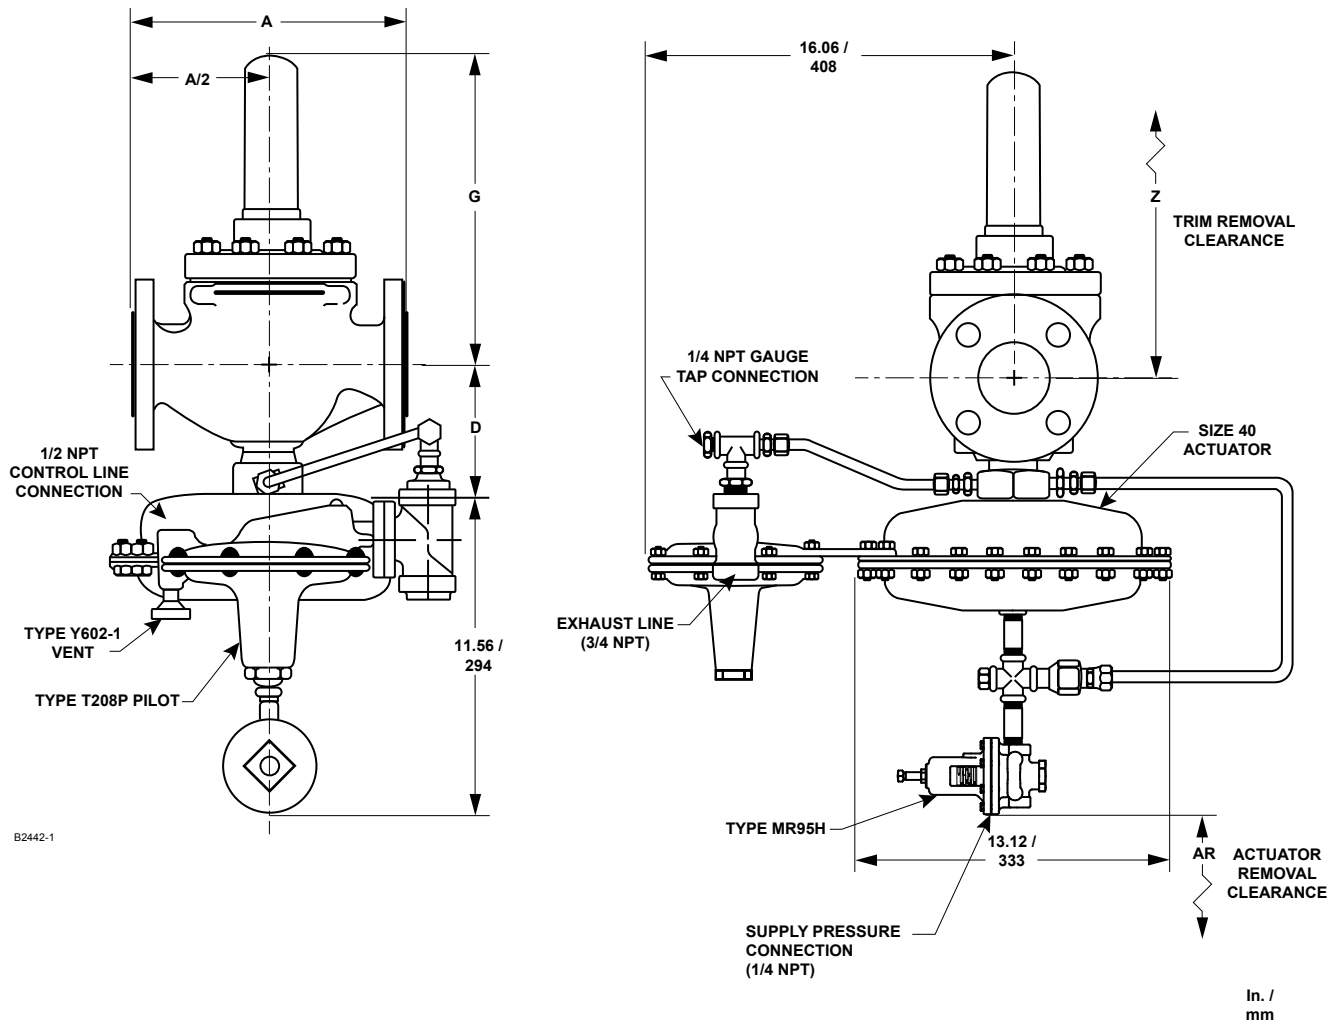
Type 1290 with Type T208P Pilot and Standard Closing Cap Dimensional Drawing
